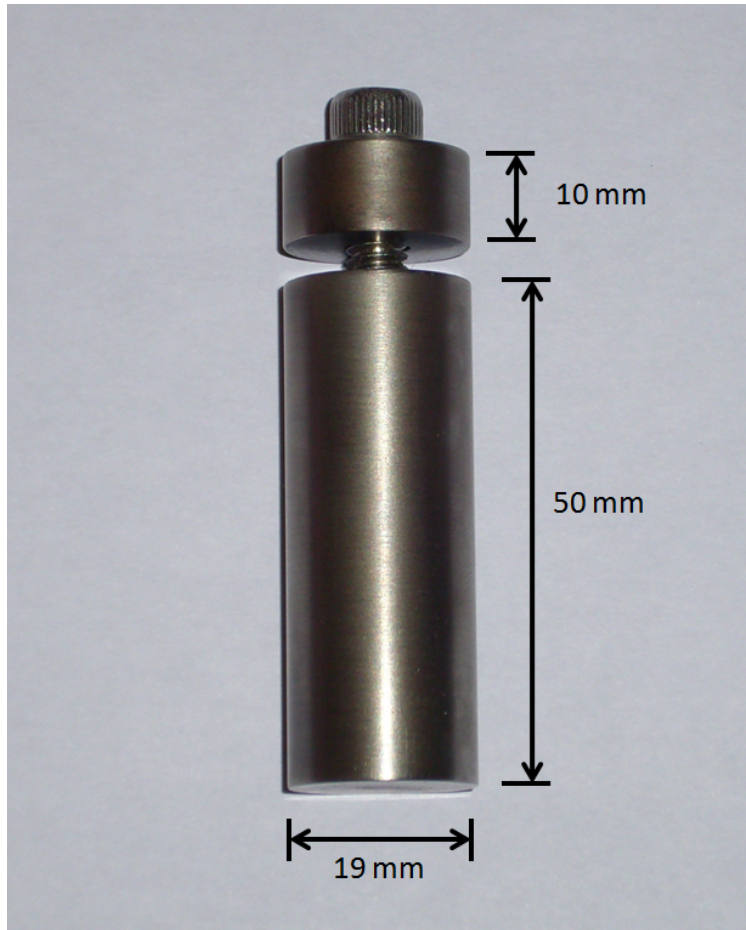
Supported shear punch fabricated from A2 tool steel.
